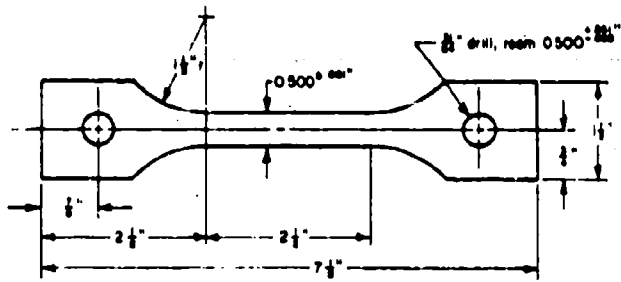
SHEET AND THIN-PLATE TENSILE SPECIMEN
